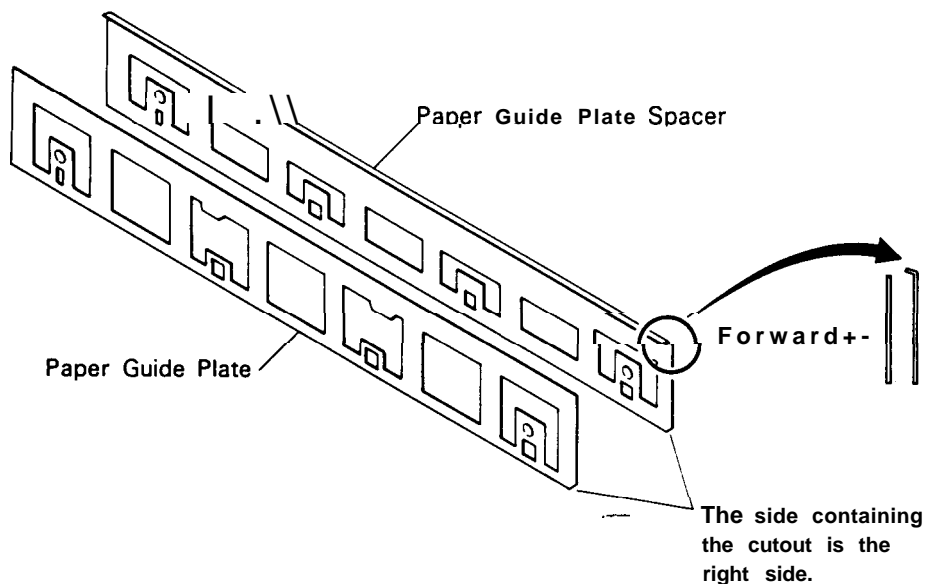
Removal of Paper Guide Plate and Spacer
